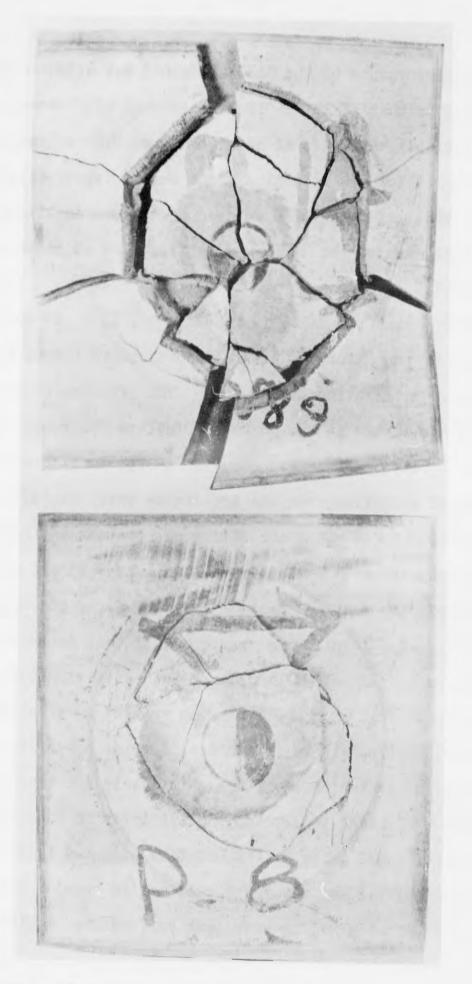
Fractures of Prime Plate Bulge Test Specimens. (20" x 20" Plates).
